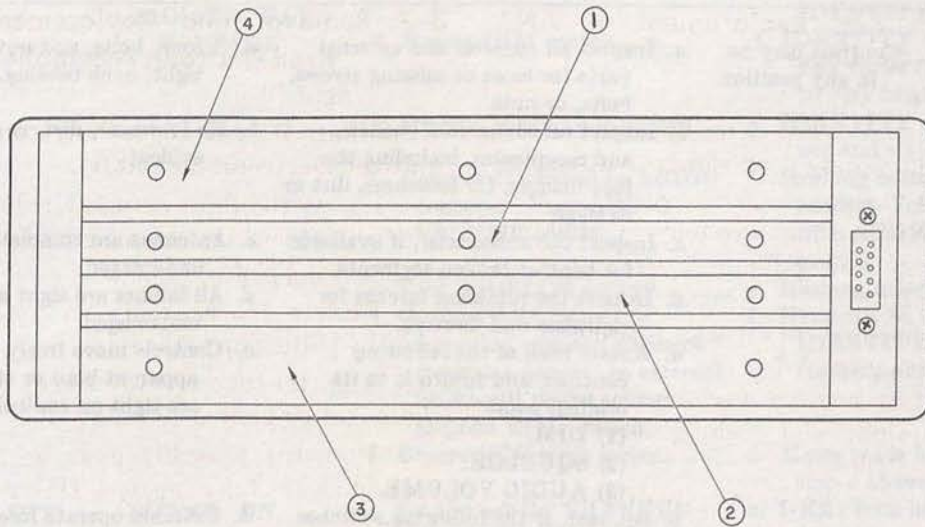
AN/USQ-42 front housing assembly 1A1, front view.
